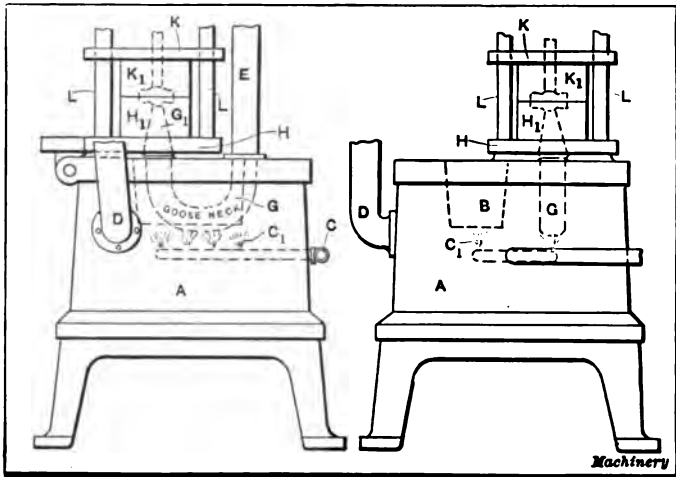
Drawing illustrating Principle of Van Wagner Die-casting Machine
